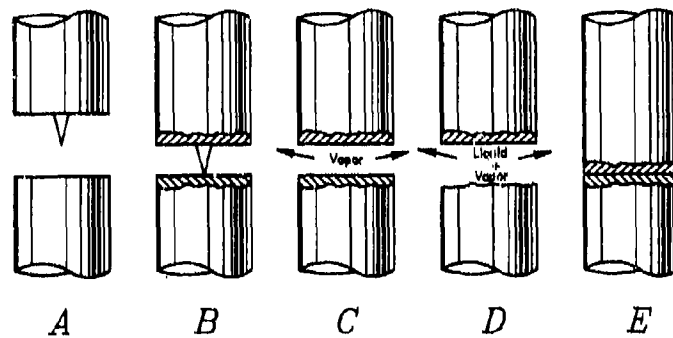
Time process of CDW process: (a) cathode positioned above anode; (b) arc ignition at the welding tip; (c) plasma expulsion; (d) ejection and condensation of plasma into small metal particles; and (e) CD joint after electrode contact.
